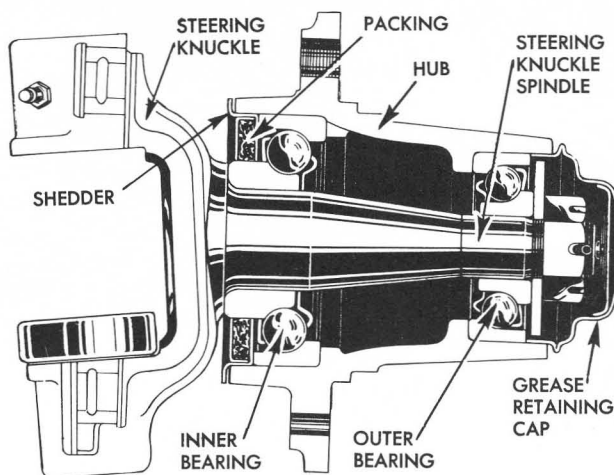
Steering Knuckle, Wheel Bearings and Hub
